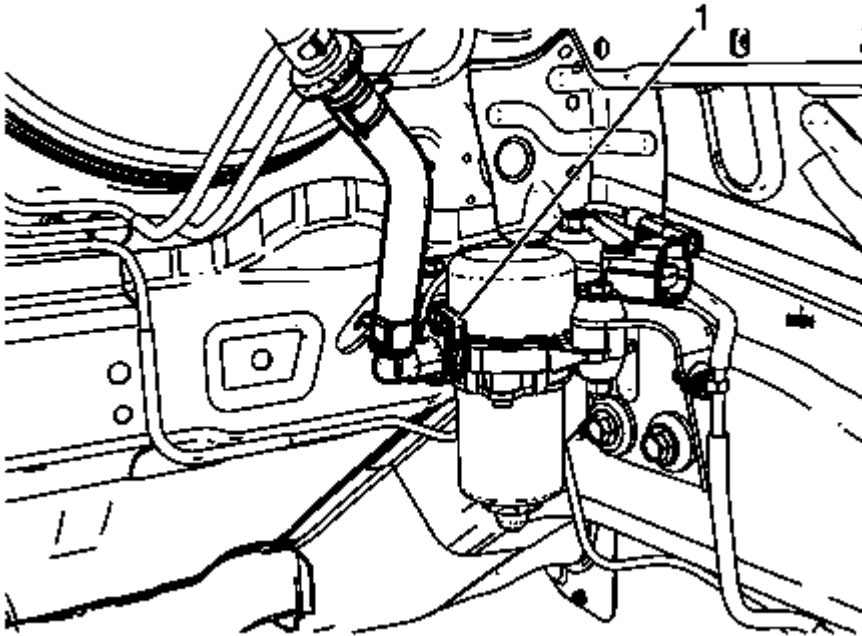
Power Brake Booster Vacuum Hose Quick Connect
